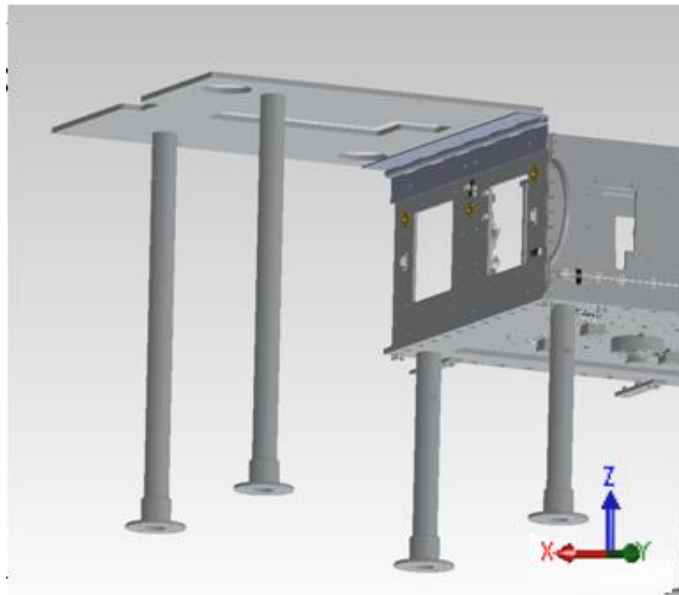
Folded Up Side Panels with Handles on Assembly Jig
